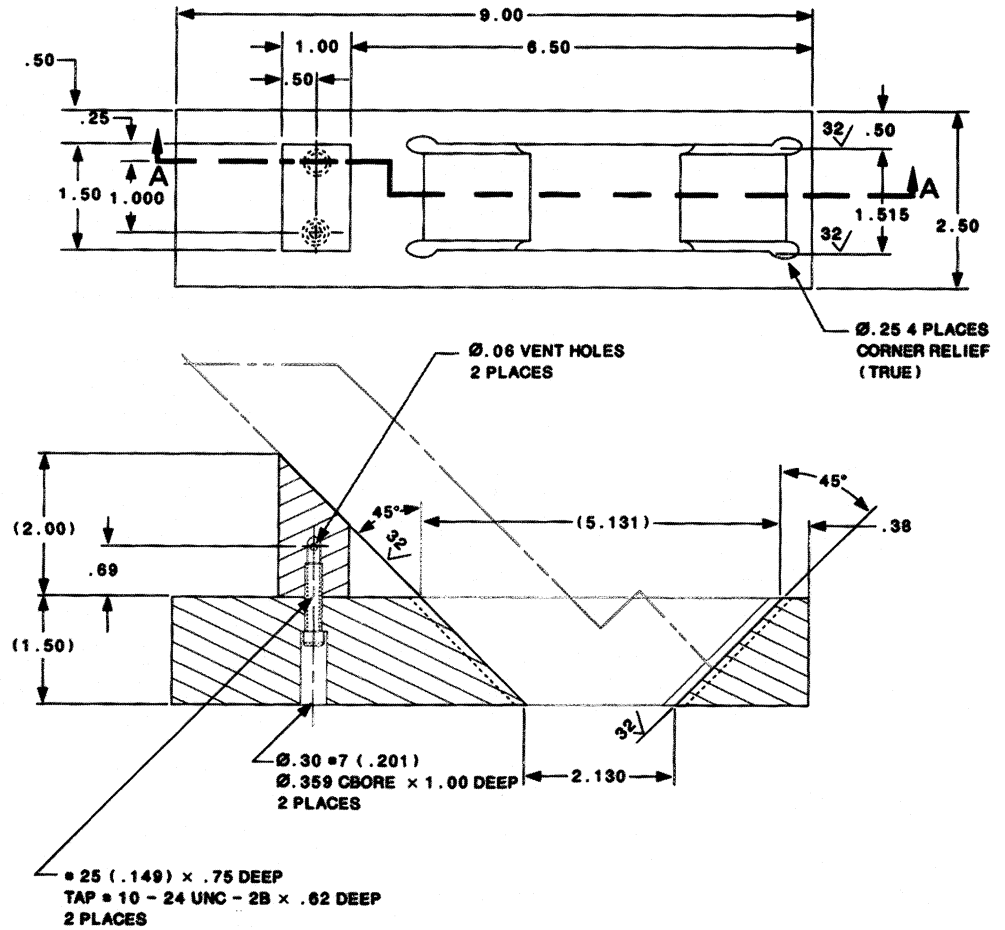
Assembly of Fixture with a Full Front Section View
